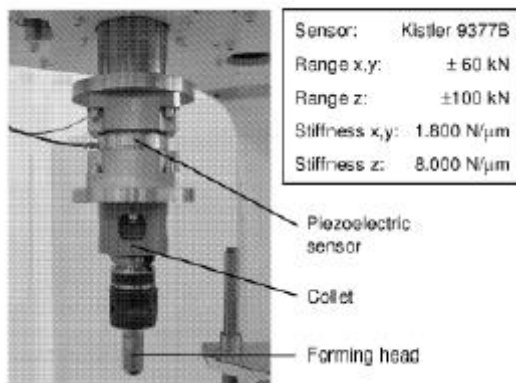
The ISF equipment for forces measurements on CNC machine.
